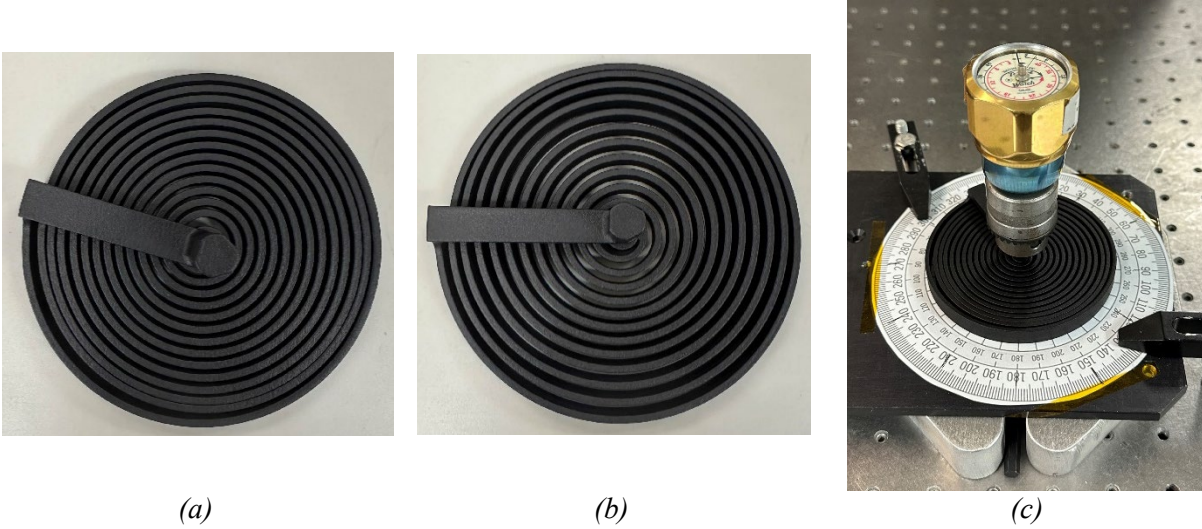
MJF nylon spiral springs (a) 17186777-1 & (b) 17186778-1, & (c) the nylon spiral spring test setup.
